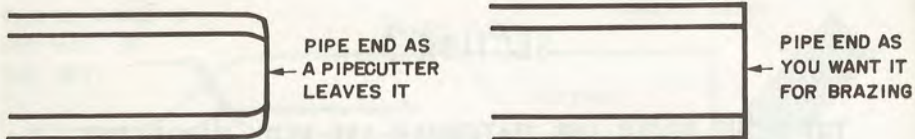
The sketch at the left shows, with some exaggeration, why using a pipe cutter makes extra work in preparing ends for brazing.
